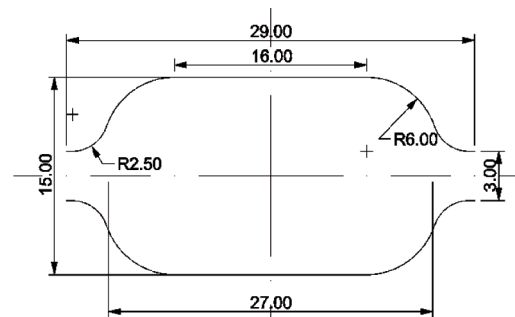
The shape and dimensions of the preforming pass used in rolling
